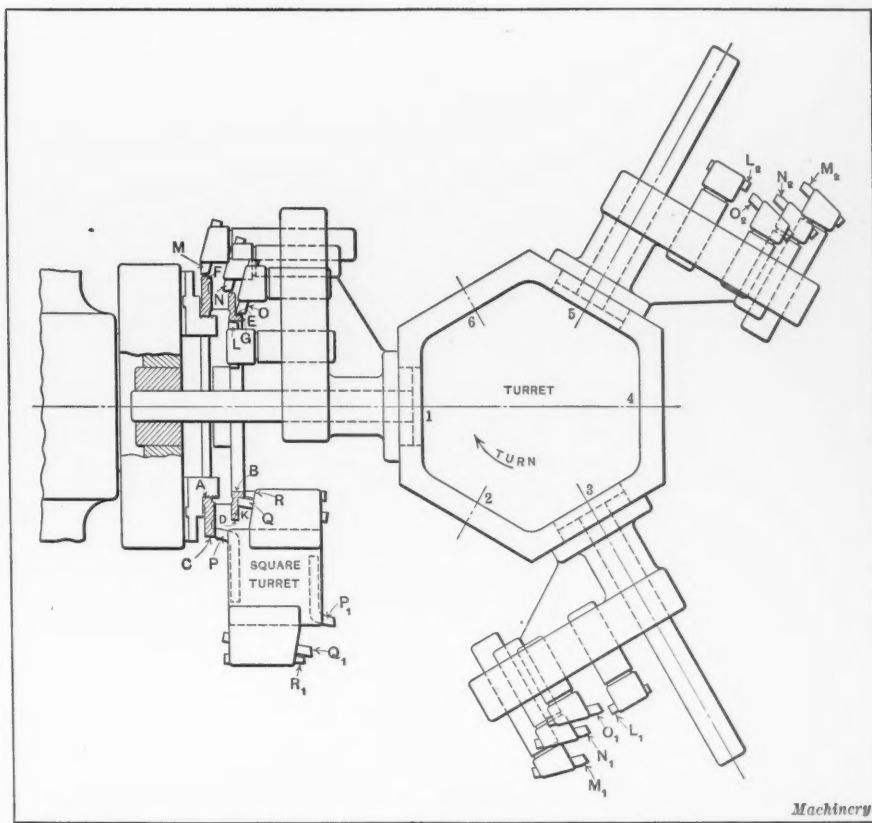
Tool Lay-out used in the First Operation on the Casting illustrated in Fig. 22
